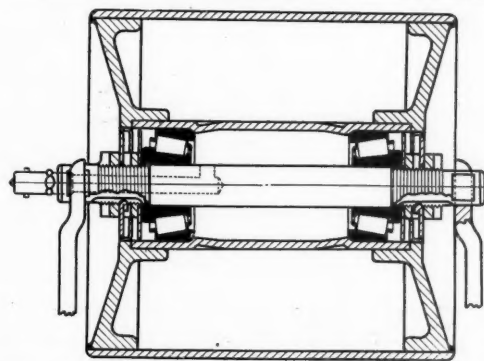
Belt Conveyor Mounting, Showing Liberal Provision for Lubrication
